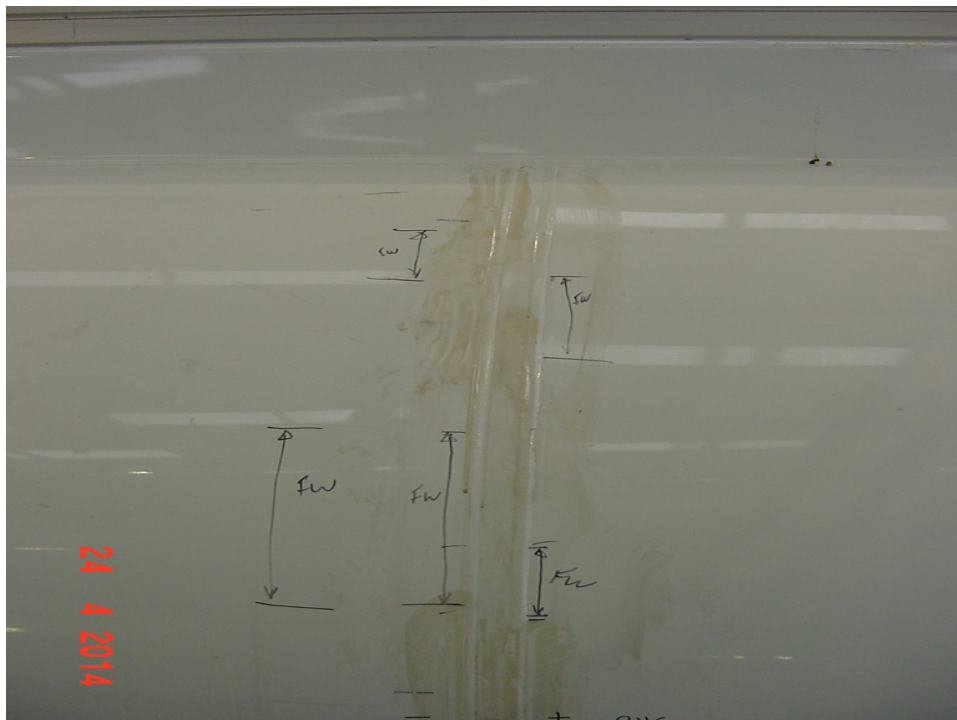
Offside (labelled right-hand side, RHS), Band G.
